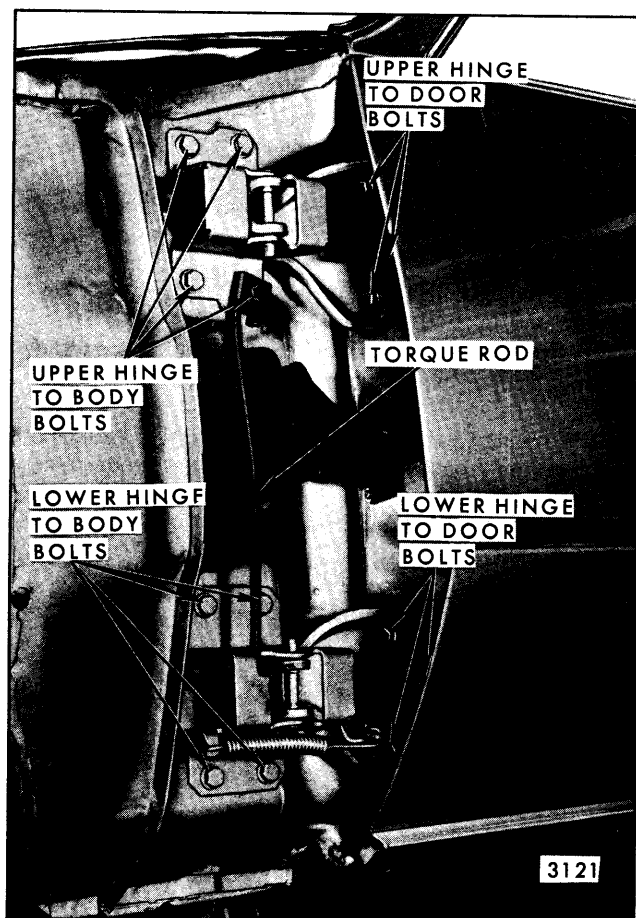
Front Door Hinge and Torque Rod Installation - "E" Styles
